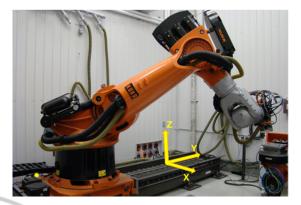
Photo of the six-axis KUKA KR 500-2 MT industrial robot.
